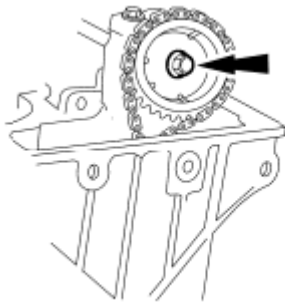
Identifying RH Camshaft Sprocket Bolt
